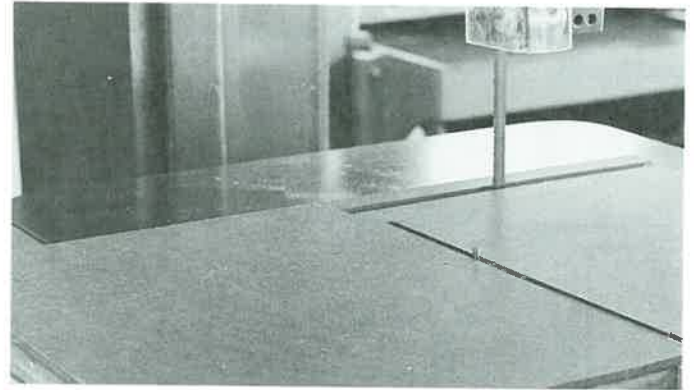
Circle cutting jig attached to the guide post of the band saw. (*Delta International Machinery Corp.*)
